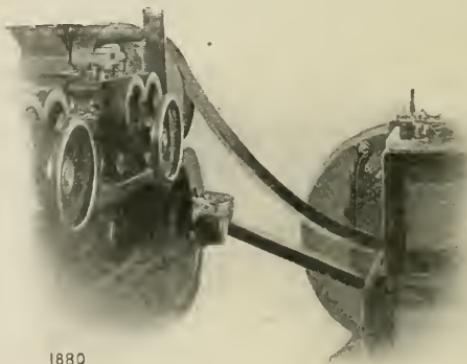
40-horsepower motor drive, 720 revolutions per minute. Drives shredding machine. Chain shown in motion. Note smooth action.
